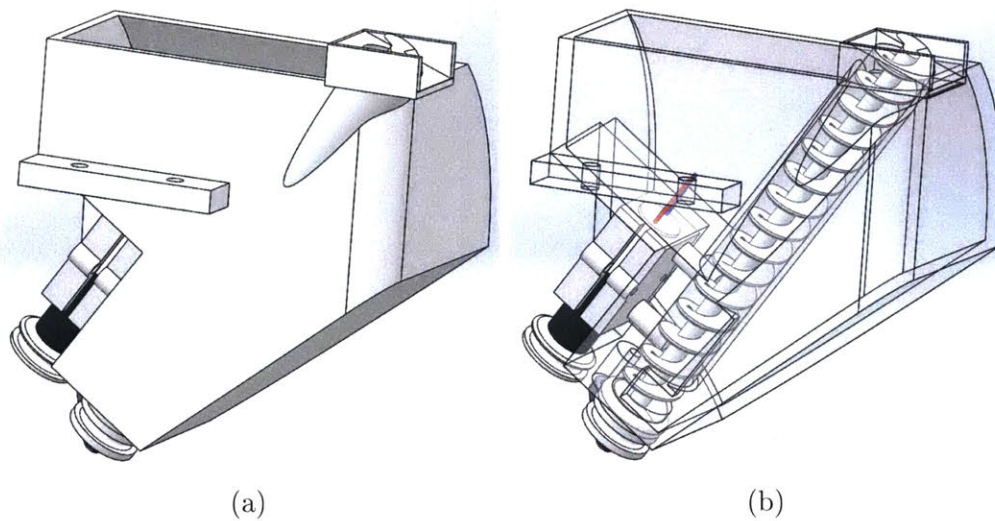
Model of the updated powder hopper subassembly with a wireframe view showing the details of the powder feed screw (drive o-ring not shown).
